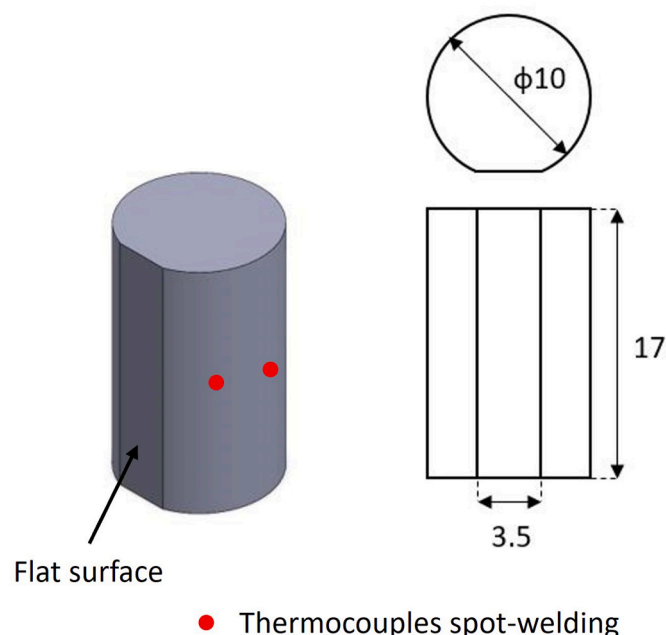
Raw specimen produced for the compression tests (dimensions in mm).
